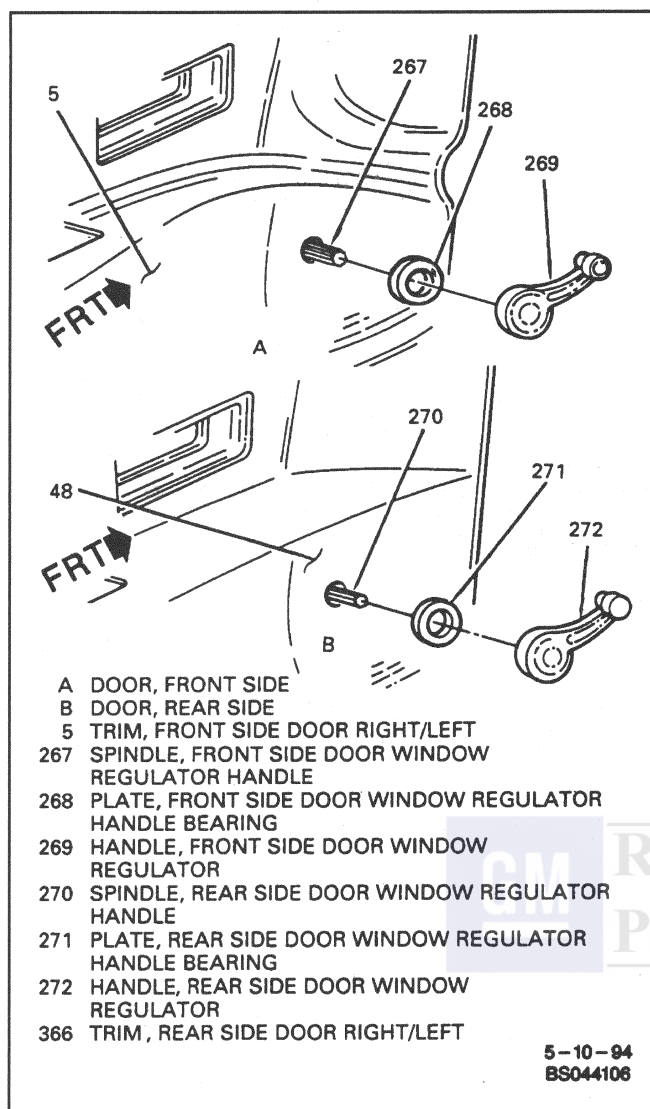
Front and Rear Side Door Window Regulator Handle-(Chevrolet)
